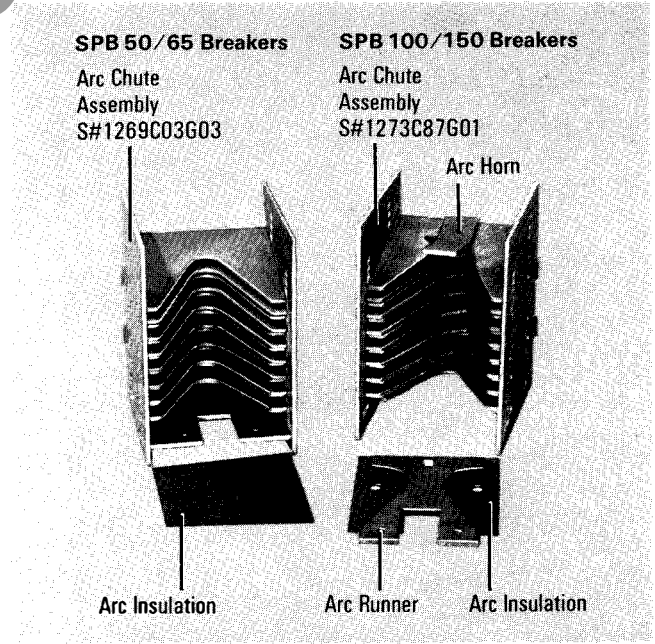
Typical Arc Chute Assemblies for 250/800/1600 Amp Breakers.
